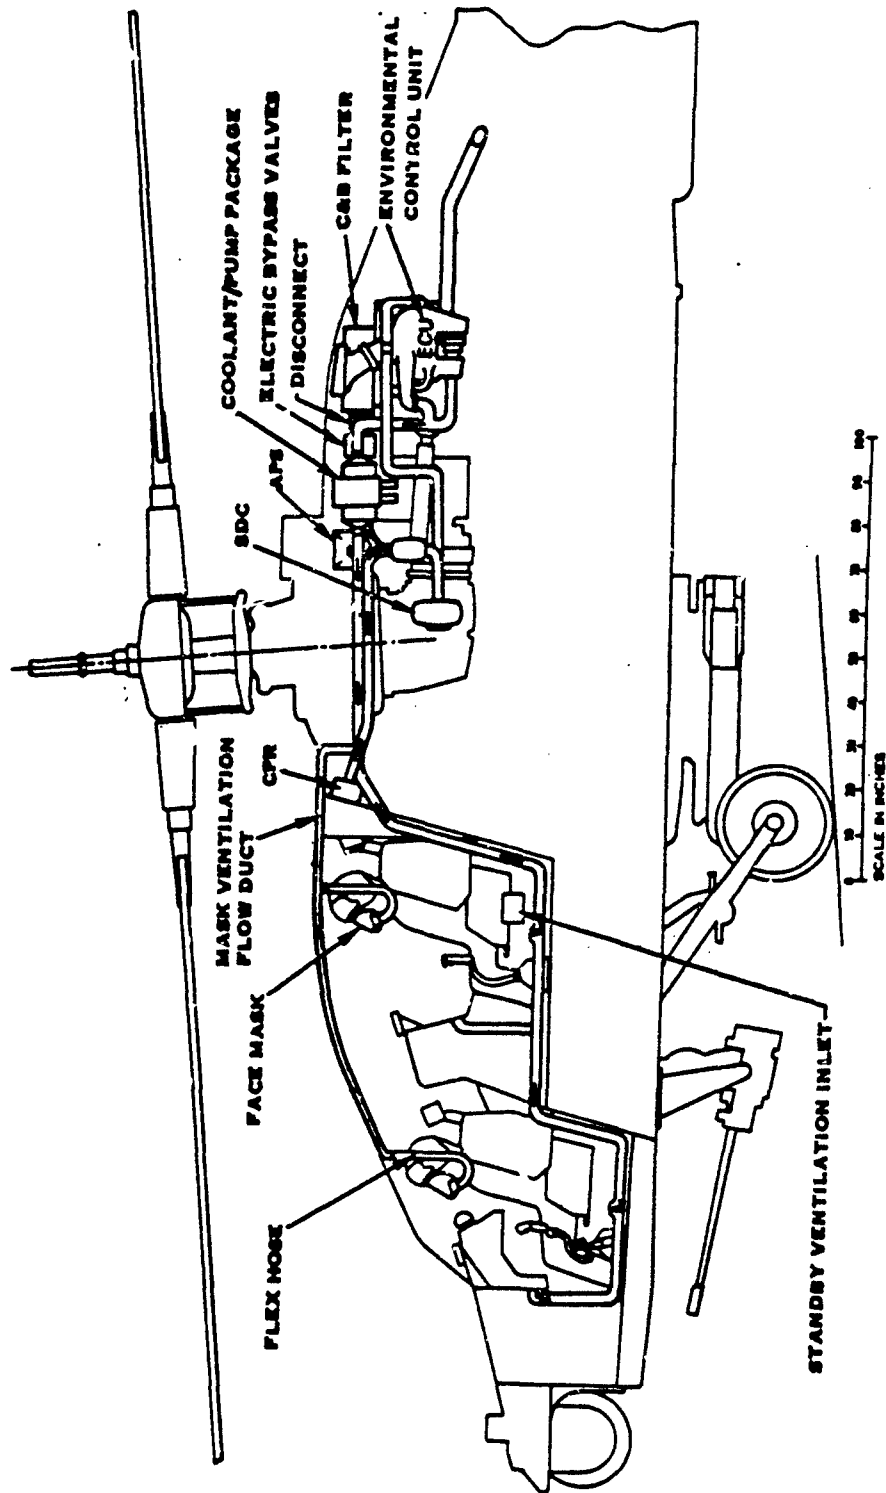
EXISTING SYSTEM WITH COLLECTIVE FILTER, RECIRCULATION OVERPRESSURE SYSTEM, COOLANT PUMP PACKAGE, AND VENTILATED MASK PROVISION ADDED
